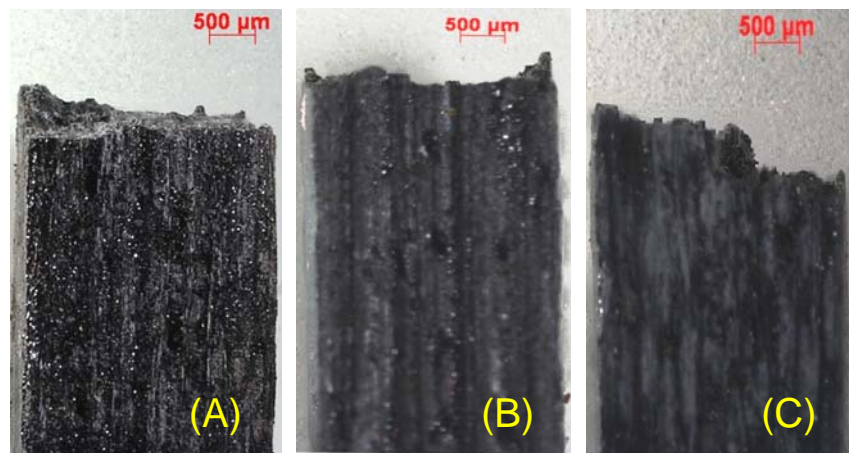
Fracture surfaces of composite C1 specimens obtained in fatigue testing in steam at 1300 °C, Maximum Fatigue Stress Level: 140 MPa (A), 120 MPa (B), and 100 MPa (C).
